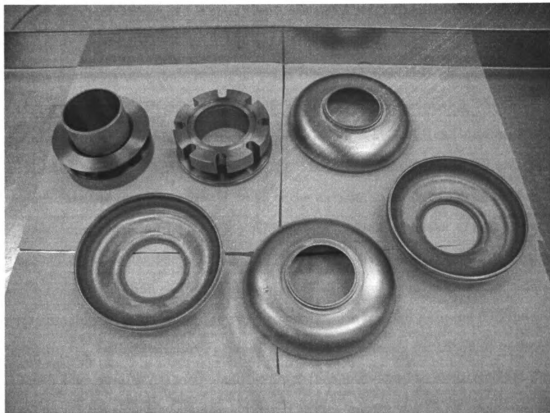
Niobium half cells after stamping and machining for weld preps.
